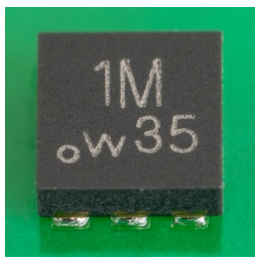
DFN2020-6 (SOT1118) without wettable side pads (6-D294): Solder paste printing without fails
